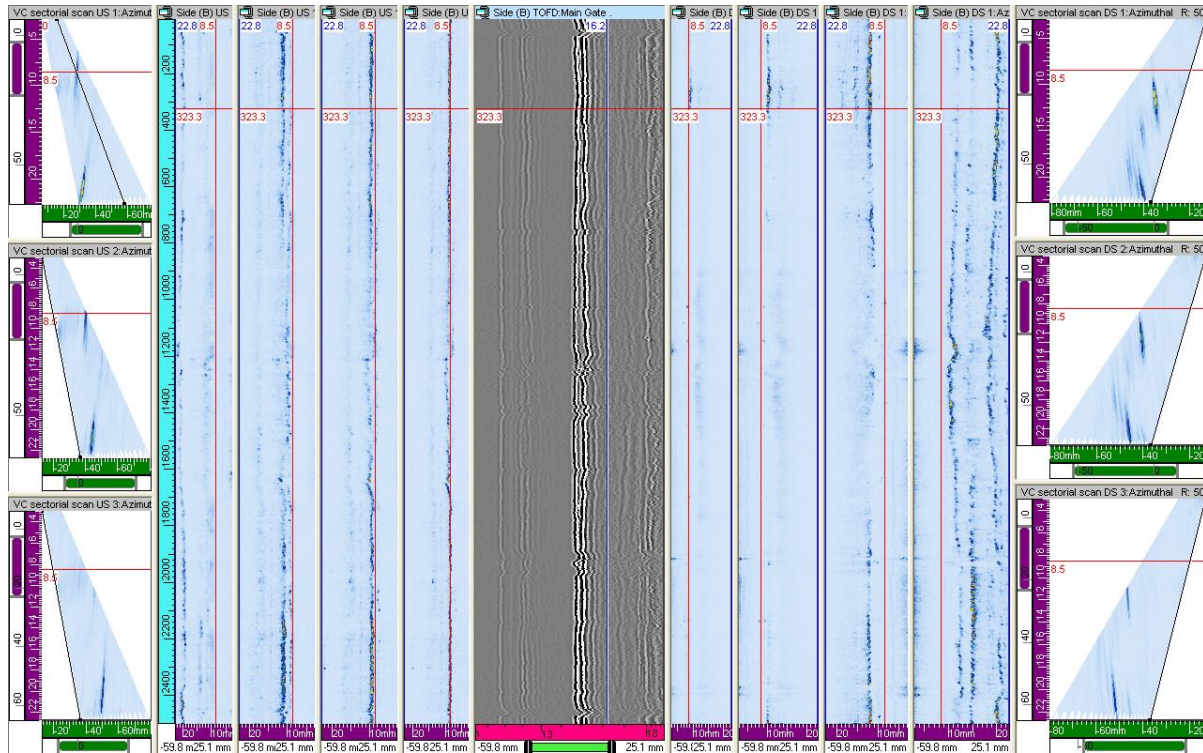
Weld PB 1005 - EWI LPA Scan Screen Capture
